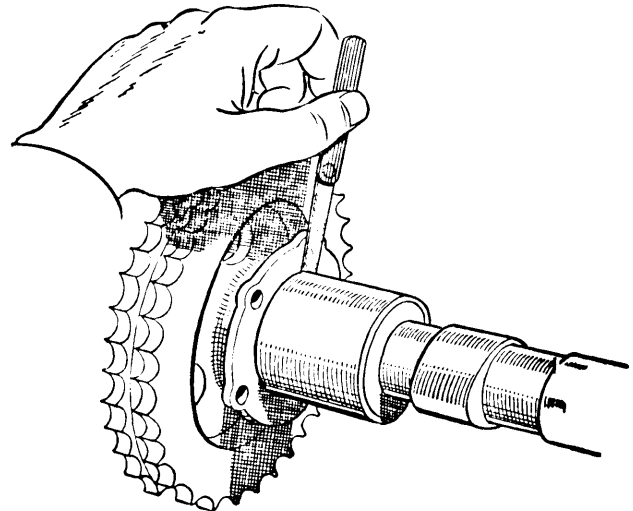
Using a Feeler Gauge to Measure Camshaft End Play
